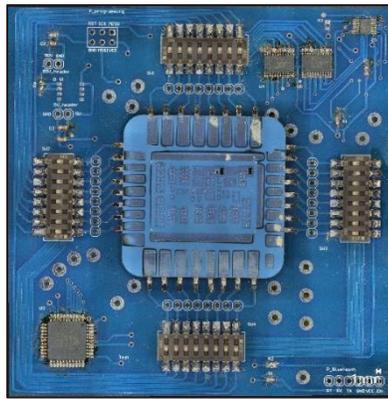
Fabricated LTCC tile mounted on control system PCB
